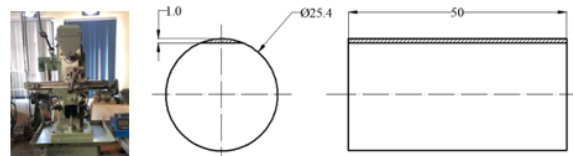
HERCUS CF 7264 Freis Machine and Test Piece Dimensions [5]
